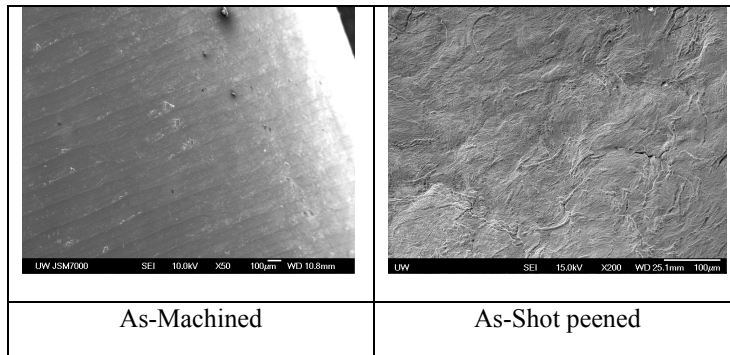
As-machined surface and shot peening surfaces of Ti5553
